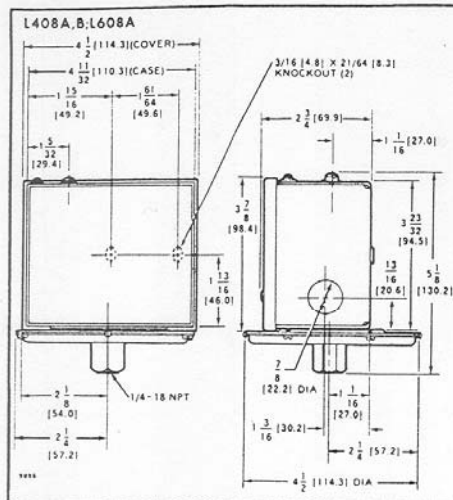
MOUNTING DIMENSIONS OF THE L408A,B AND L608A VAPORSTAT CONTROLLERS, IN INCHES [MILLIMETRES IN BRACKETS].
